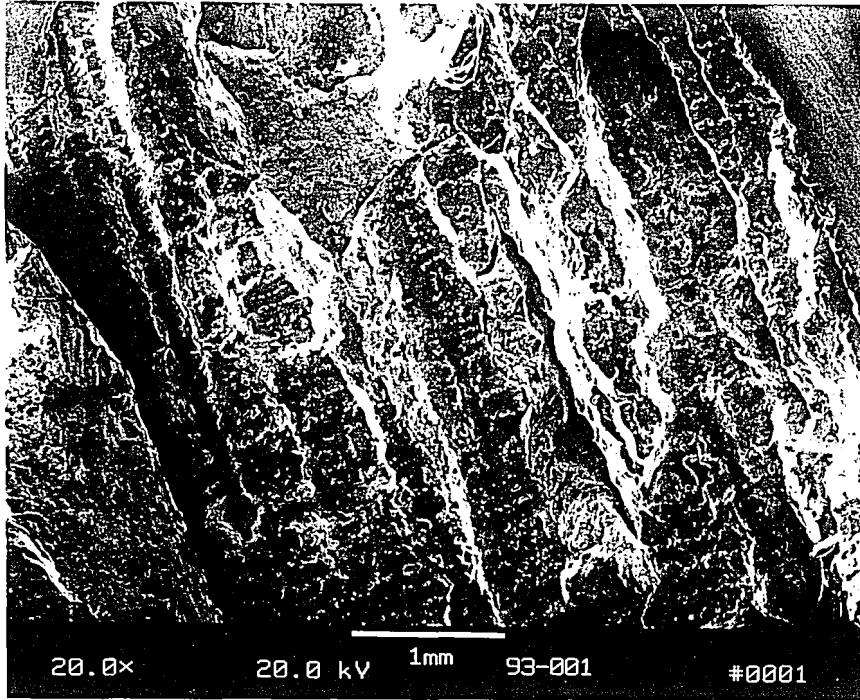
Heat #4 On-Cooling Gleeble Specimen (2050→2000F) Fracture Face Showing 0% Reduction of Area. Note Appearance of Primary and Secondary Dendrites on Fracture Face and Smooth Fracture Surface Characteristic of Cleavage Fracture Mechanism.
